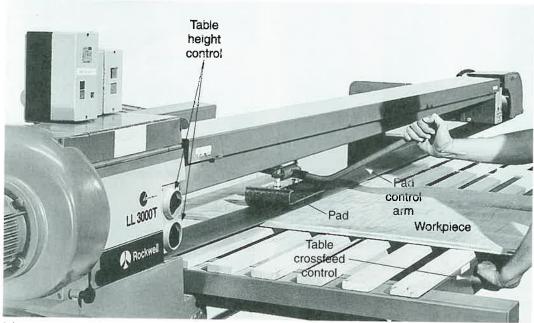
Large, flat surfaces can be smoothed with the stroke sander. (*Delta International Machinery Corp.*)
